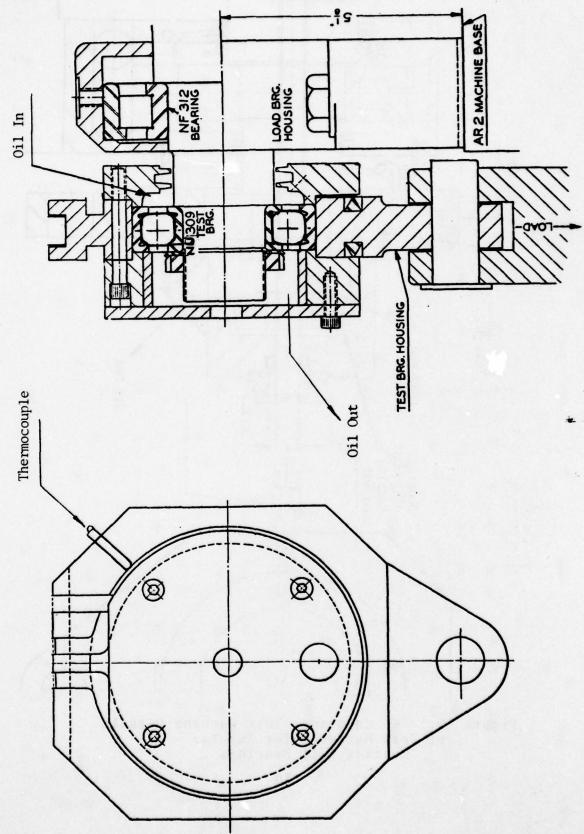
SKF Endurance Test Machine Details of Test Hardware for Cylindrical Roller Bearings
